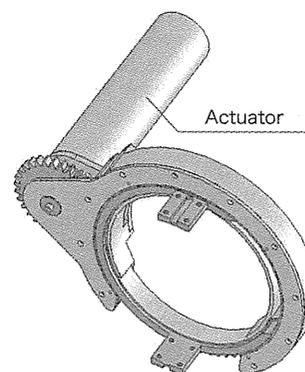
Upper arm rotation mechanism. A ring spur wheel makes turn round frame.
